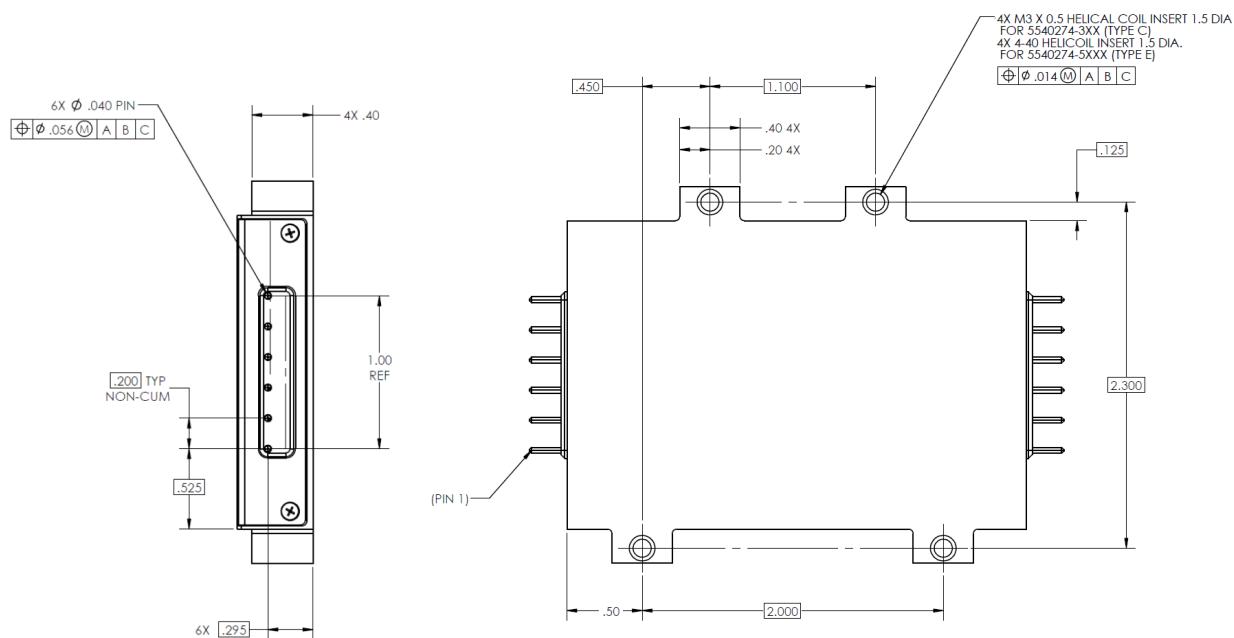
Axial Pins and Threaded Tabs Package Bottom View (-C or -E)
